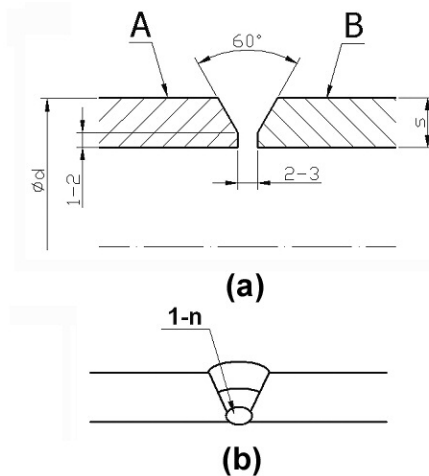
Schematic preparation of welding edges (a) and welding design (b).
